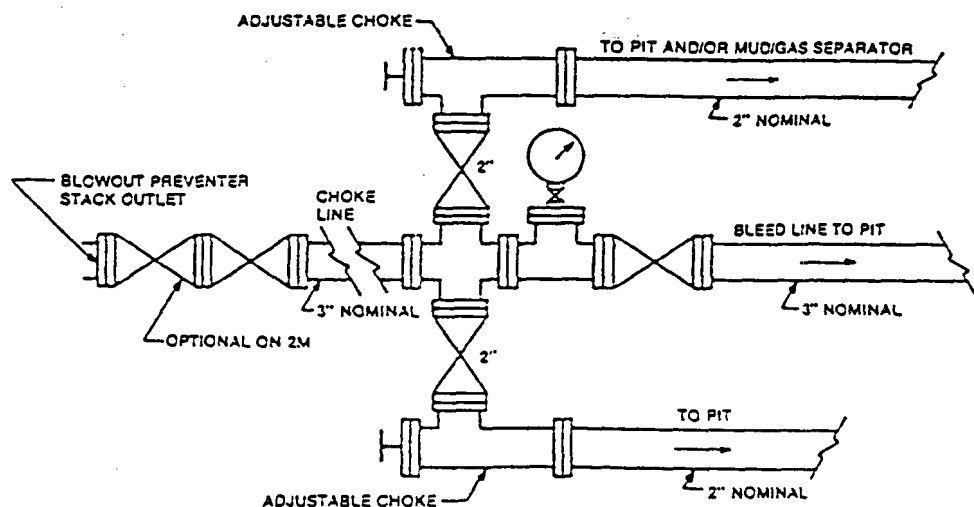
Typical choke manifold assembly for 2M and 3M rated working pressure service — surface installation.
